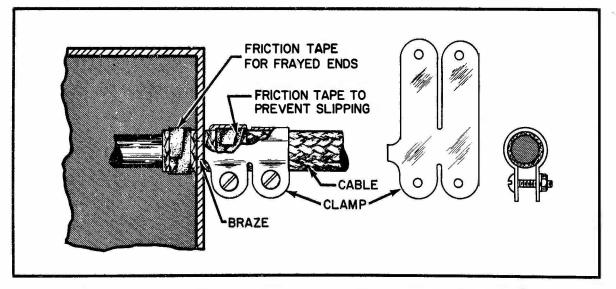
Clamps Brazed to Enclosures (Method b).
